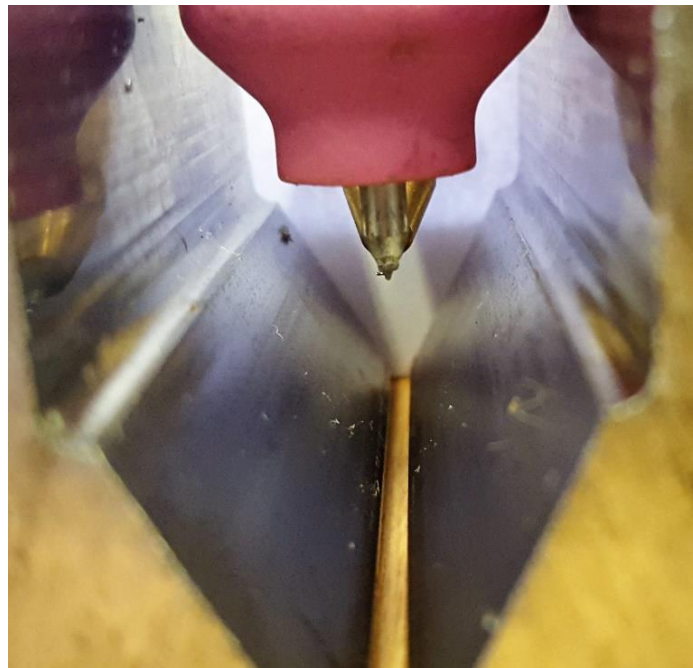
Torch unable to reach the maximum distance to the root of the weld
